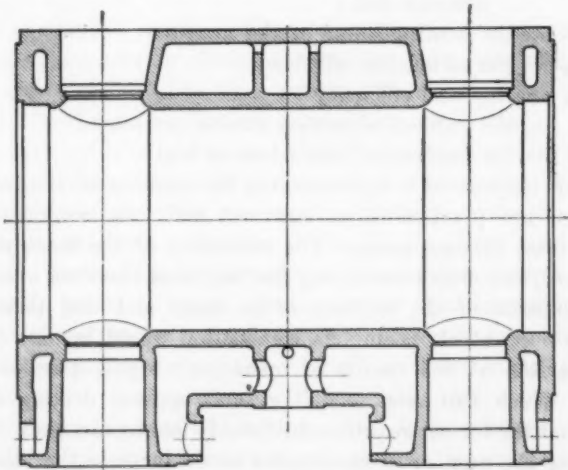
RECENT DESIGN OF ONE-PIECE GAS ENGINE CYLINDER THAT AVOIDS GLOBE-SHAPED PASSAGES TO VALVES
